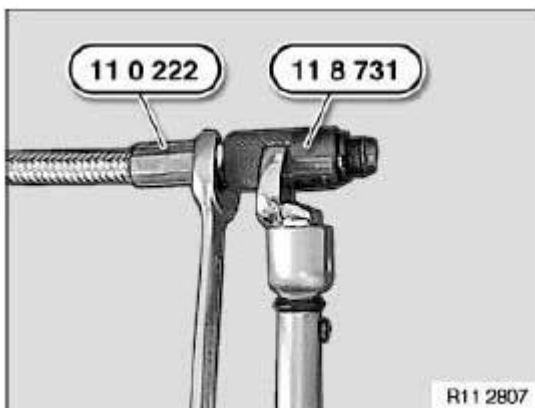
Screwing Special Tool 11 0 222 Into Special Tool 11 8 731 To 10 Nm
